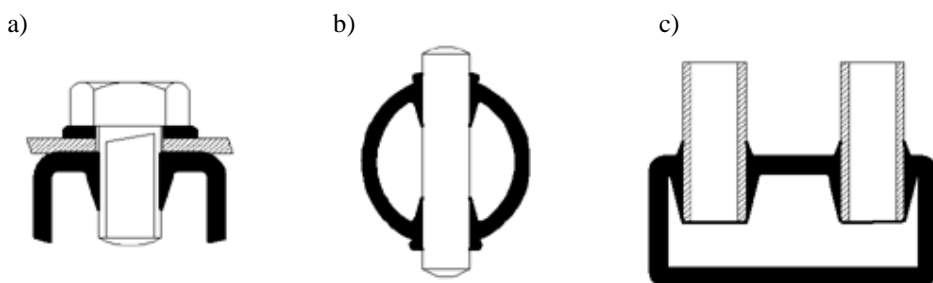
The examples of material joining by Flowdrill method: a) threaded connection, b) by bearing support, c) by brazed connection [5]
